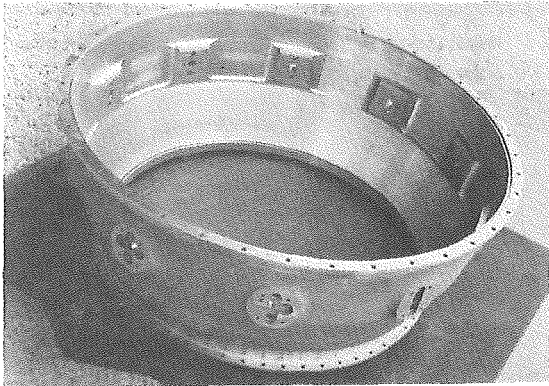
Casting shown in Fig. 7 after final machining—material FV507
